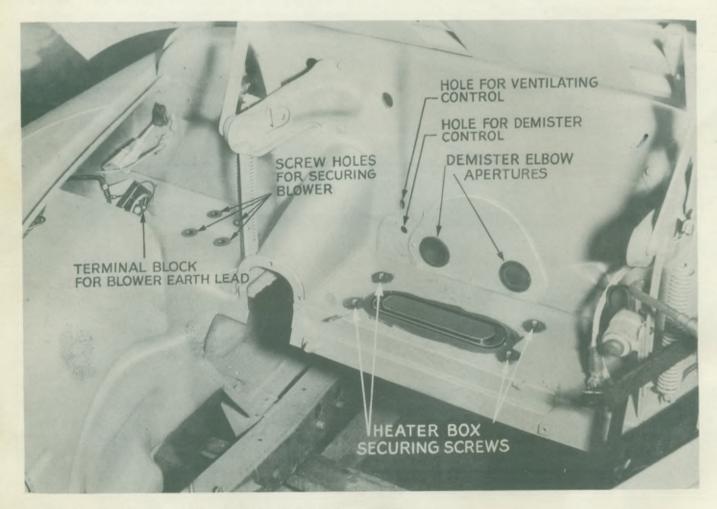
Showing position of the holes for assembling 31 KW Heater
